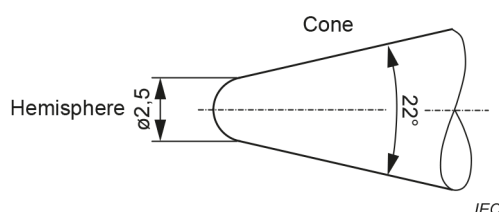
Striker element for test of resistance to mechanical shock impacts induced by sharp-edged objects
